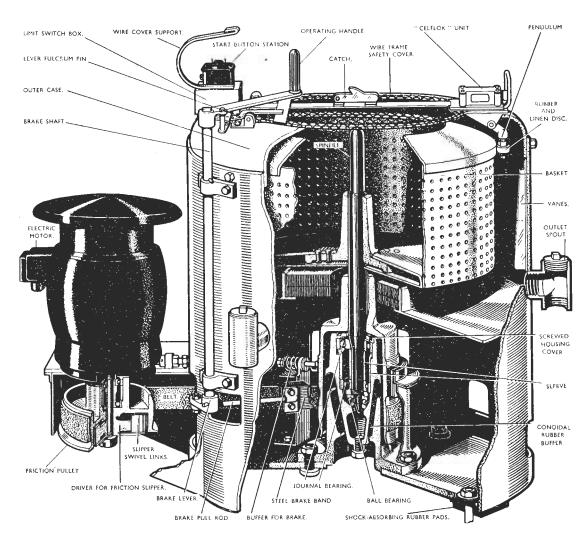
Sectional arrangement of Watson Laidlaw 27-in. hydro extractor.
